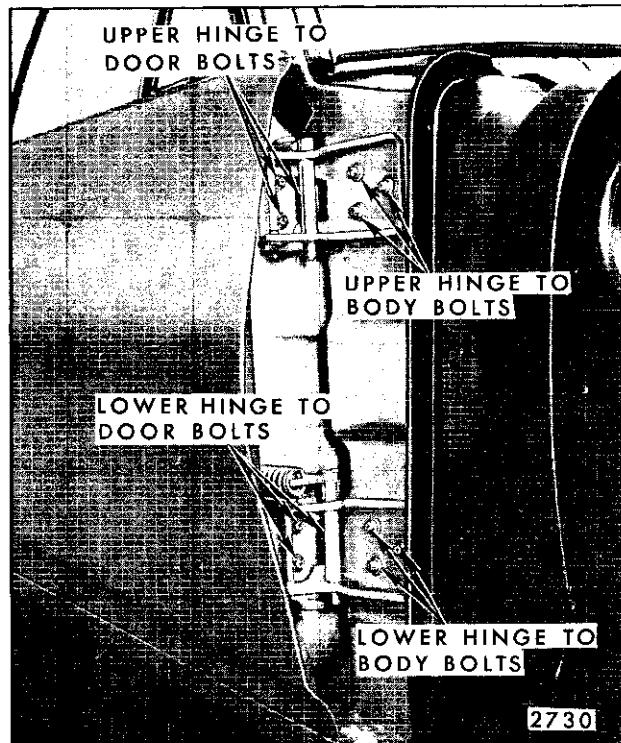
Front Door Hinge Attachment - "A" Styles
